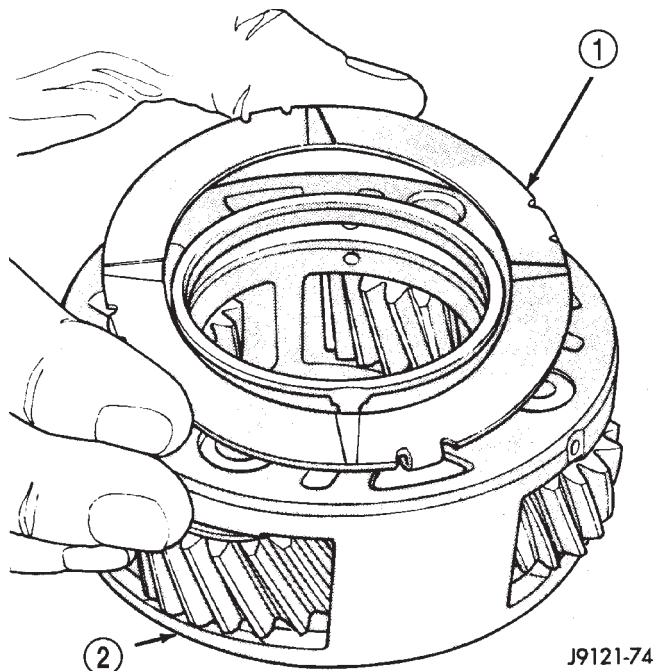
Installing Thrust Washer On Front Planetary Gear
